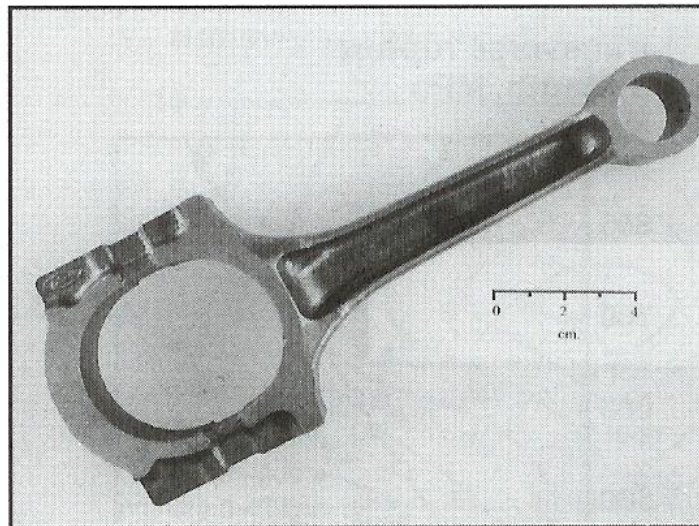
A photograph of a hot forged P/M automotive connecting rod manufactured from a Fe-2Cu-0.8C alloy (component courtesy of Exotic Metals and photo courtesy L. Emerson).
